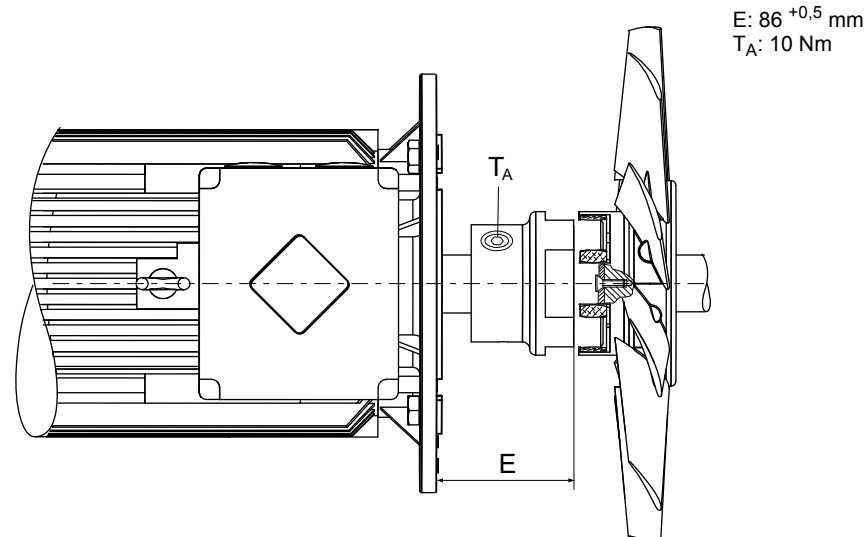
Assembling the crown gear coupling at pump with standard coupling
